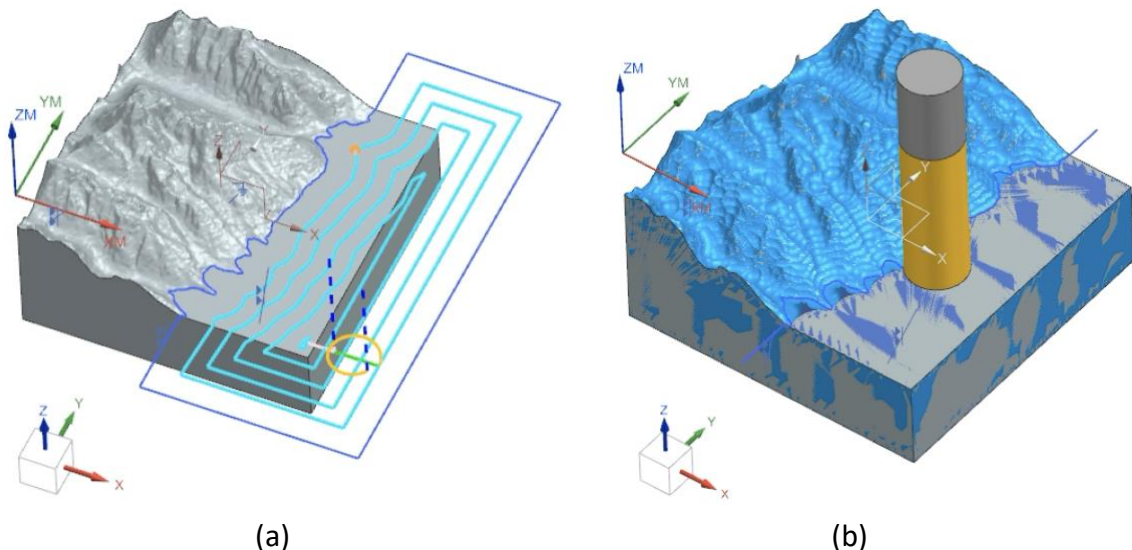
Finishing 2 – Planar Mill  $\frac{3}{4}$ " endmill (a) tool path and (b) IPW.
